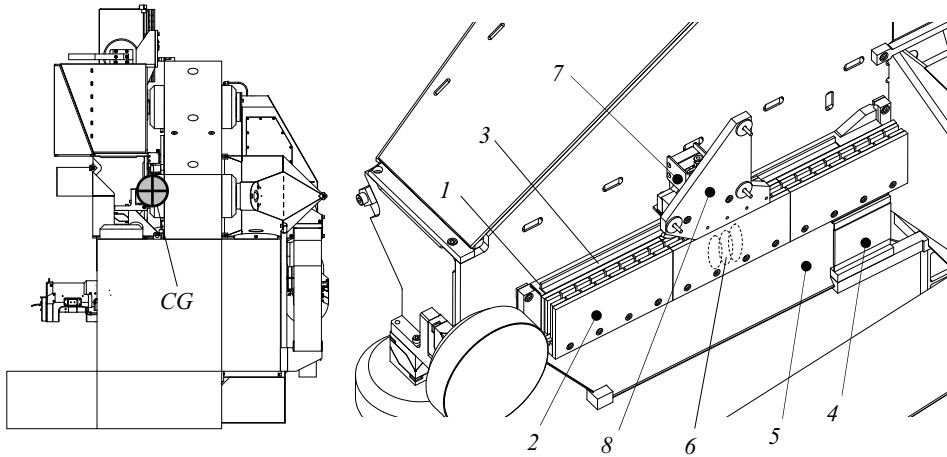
Stage assembly centre of gravity and R-stage motor and brake assembly
